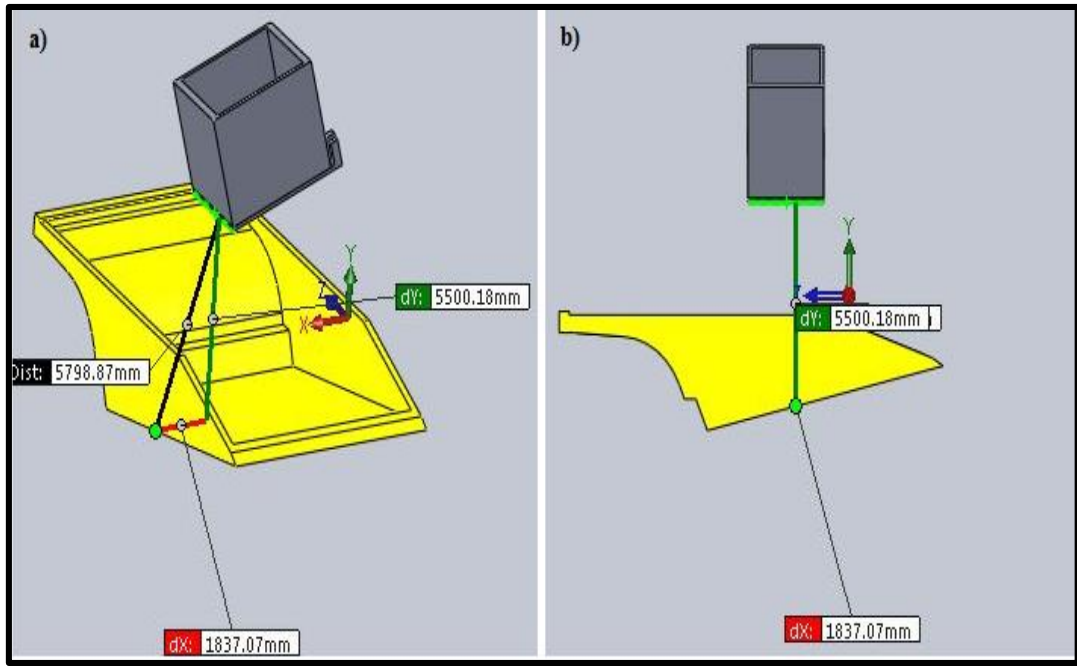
Truck Body and Shovel Dipper CAD Assembly for $H_t = 5.5$ m (5500 mm):
